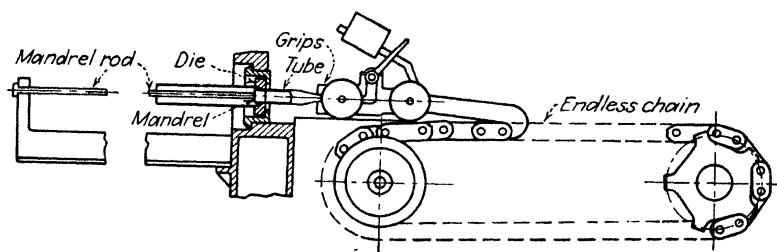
XV.—Drawing of the mechanism for cold-drawing seamless tubing.
